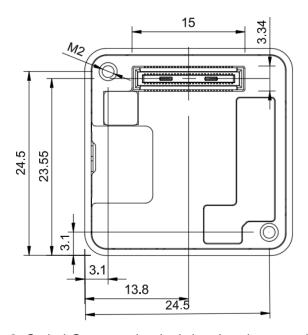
SwitchCore mechanical drawing, bottom view (mm)
